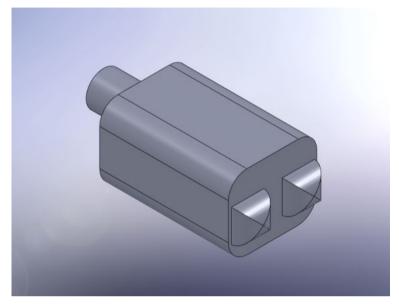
Instrument design-receiver AK-R1 1.59mm tube
